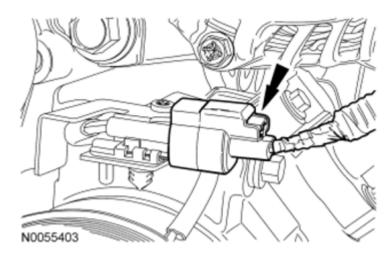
Locating A/C Compressor Electrical Connector Courtesy of FORD MOTOR CO.
